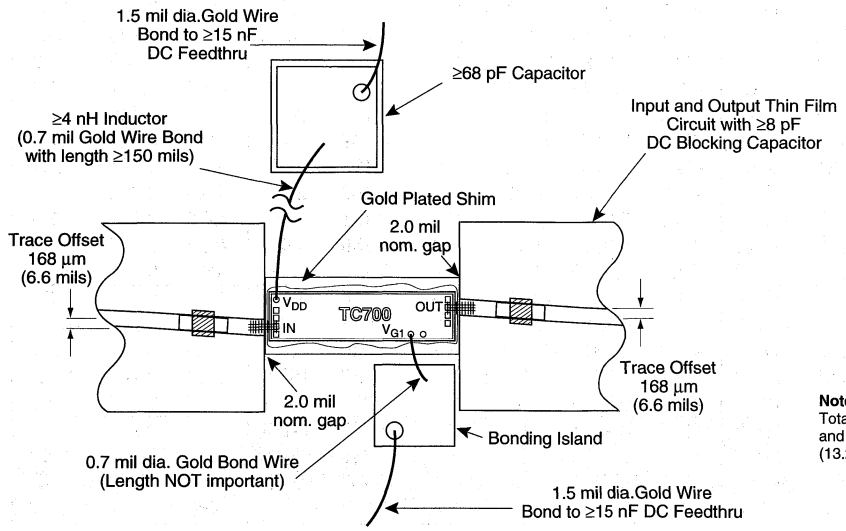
HMMC-5021/22/26 Assembly Diagram.
